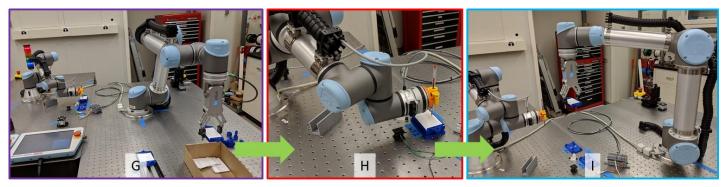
UR5 MOVING COMPLETED PART 01 TO OUTPUT BIN (G), UR3 DRAWING ON PART 02 IN FIXTURE 2 (H), UR5 MOVING PART 02 FROM FIXTURE 2 TO THE OUTPUT BIN (I)
